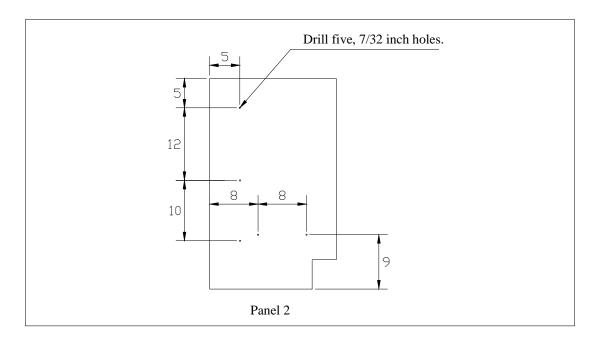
Location of cable clamp mounting holes in storage cabinet panel.
